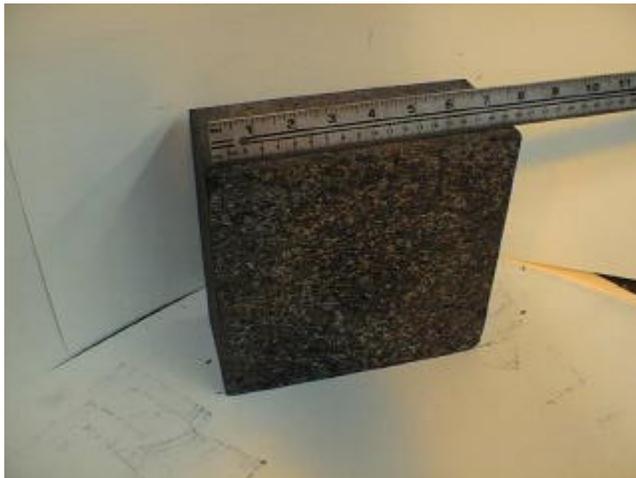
Carbon/Carbon composite brick after hot-pressing process and machining to remove surface skin (~1.6 g/cc density).
